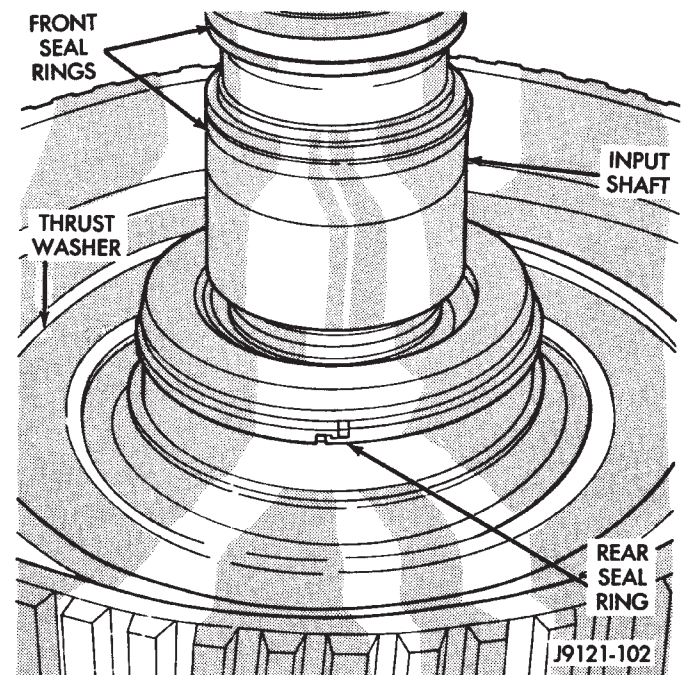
Input Shaft Seal Ring And Thrust Washer Installation
